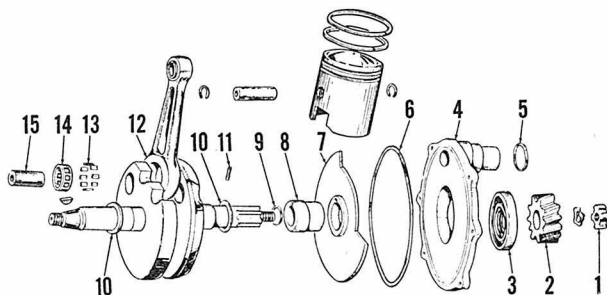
Exploded view of early crankshaft and associated parts. Drive collar (8) and rotary valve (7) were changed on later models and "O" ring (9) is not used.
